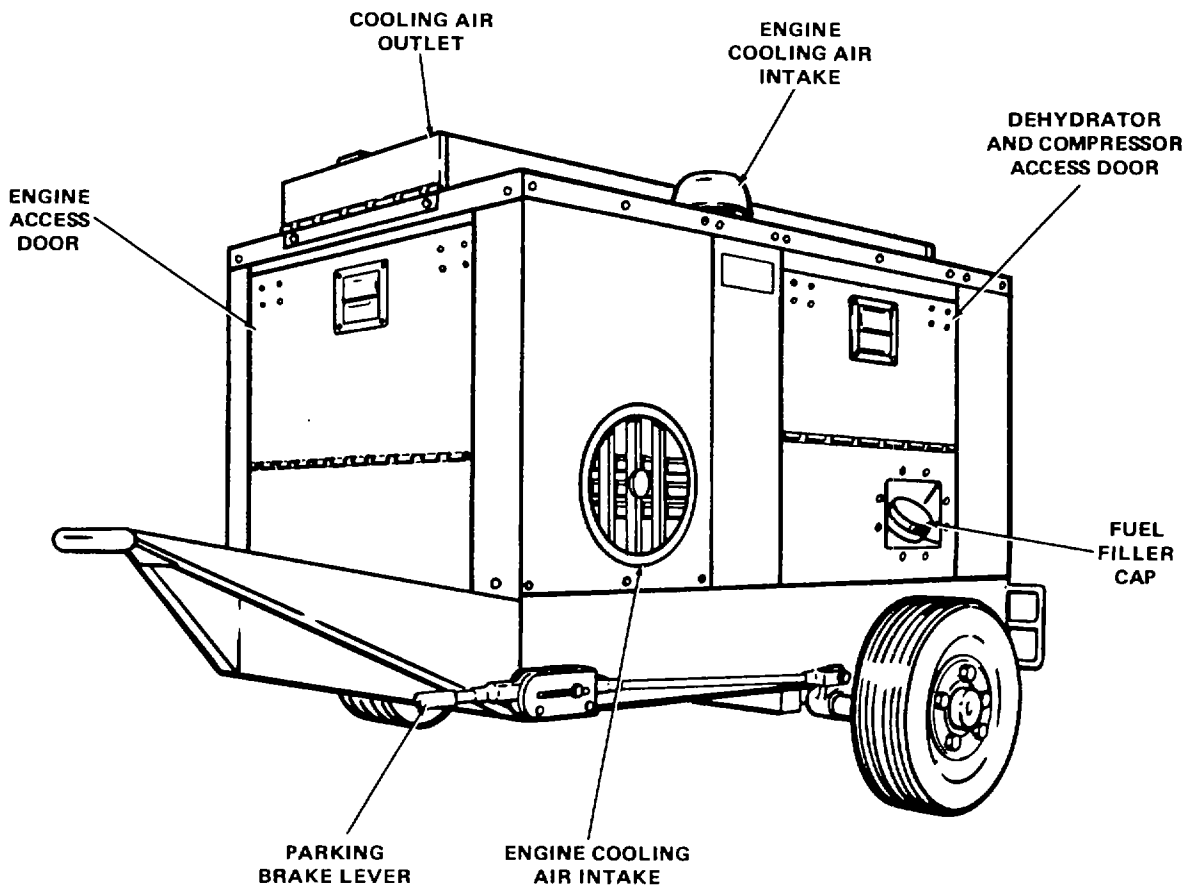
Air Compressor Model KA15-03-P, Left Front, Three-Quarter View
